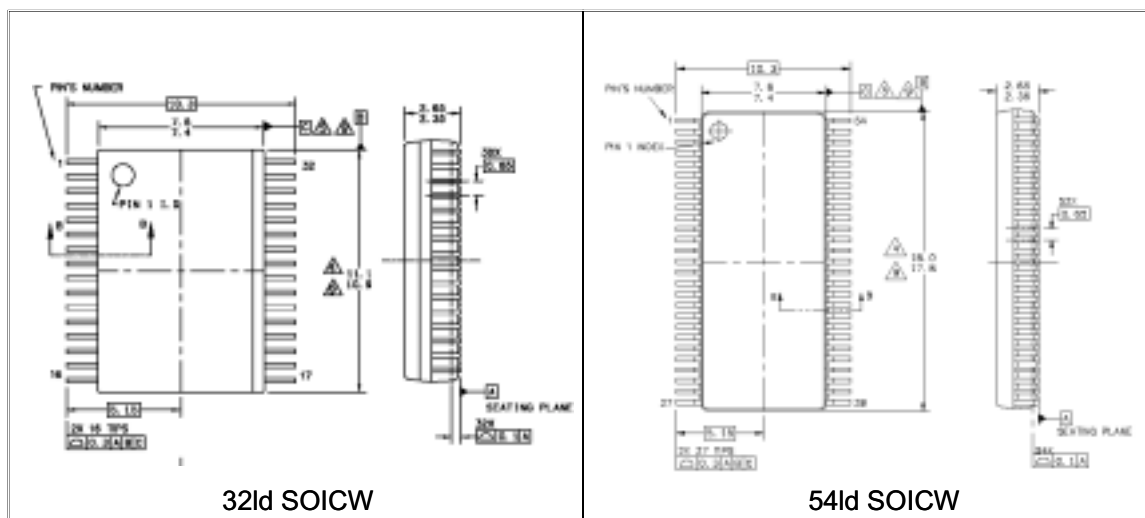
Top and Side Views of the 32ld and 54ld SOICW Packages
